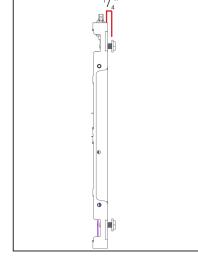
Leave 1/, "between Bolt Flange & Panel Rear
